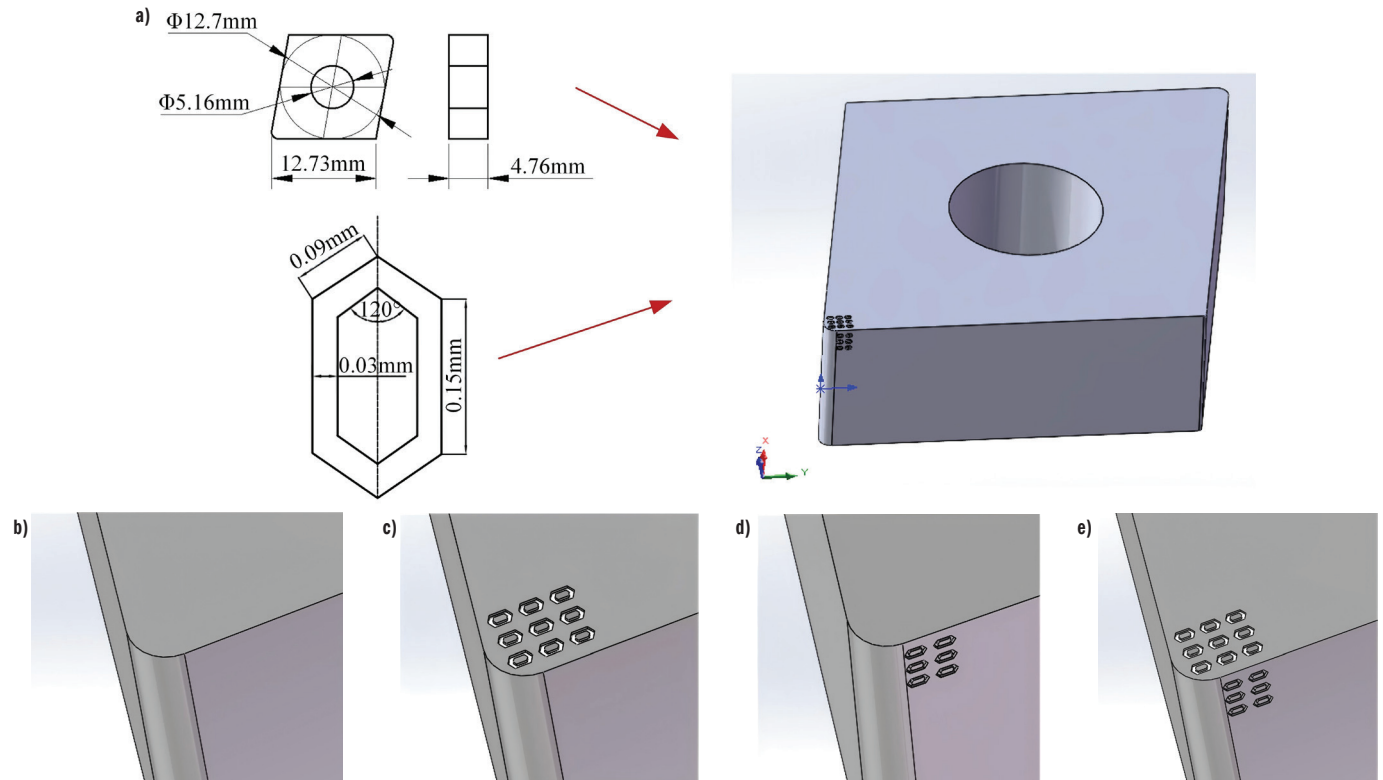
CNGA120408 tool dimensions and 3D model; a) CNGA120408 tool size; b) T1 tool; c) T2 tool; d) T3 tool; and e) T4 tool
